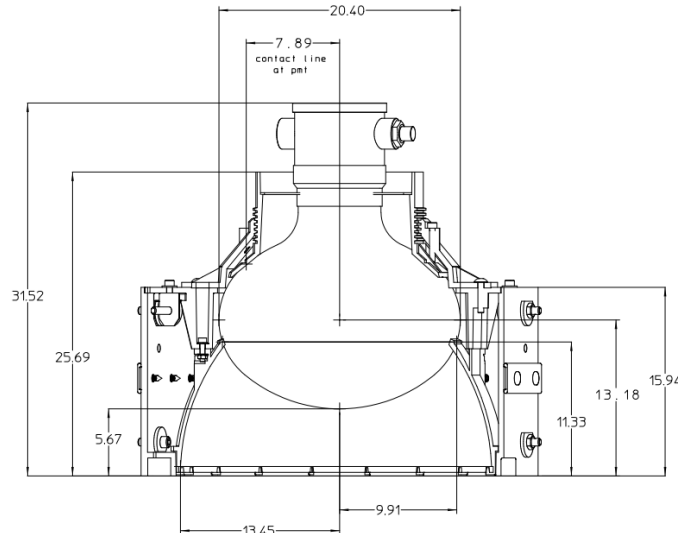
Drawing of a PMT in its housing including a concentrator [61]. Dimensions are in cm.
